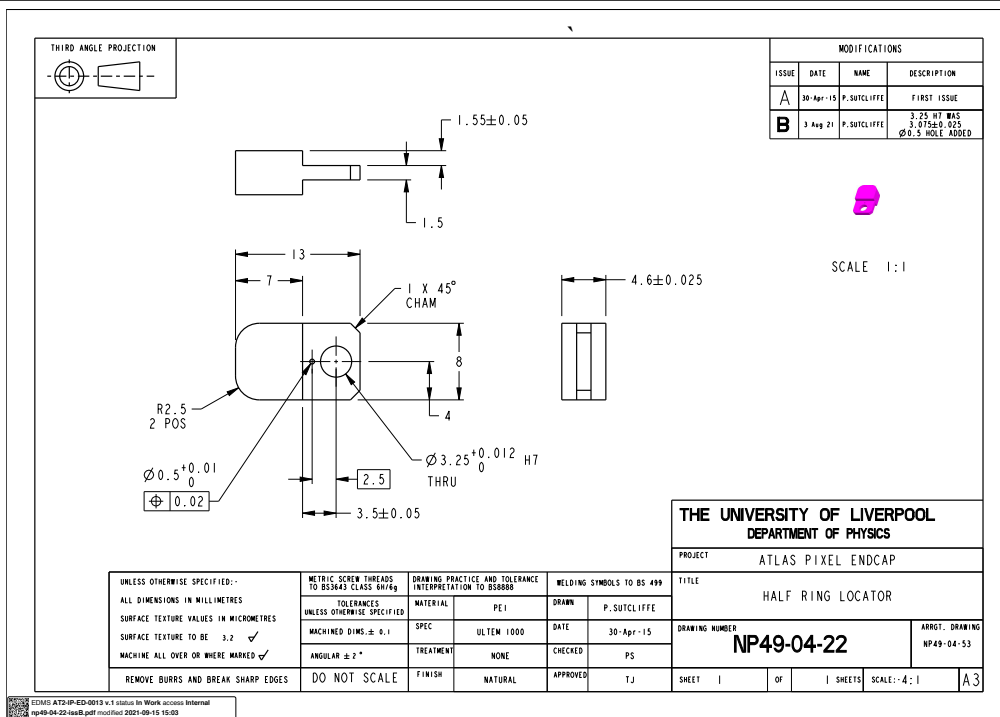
Engineering drawing of a half-ring mounting lug. There are several of these lugs per half-ring; the large holes fix the half-ring into its supporting cylinder; the small holes are used as fiducials for the module loading process.
